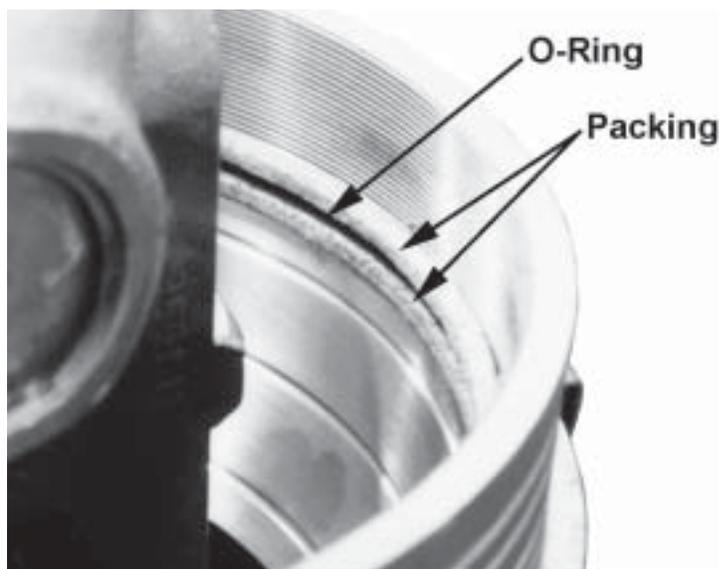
Replacement of Thrust Socket Packing and O-Ring
